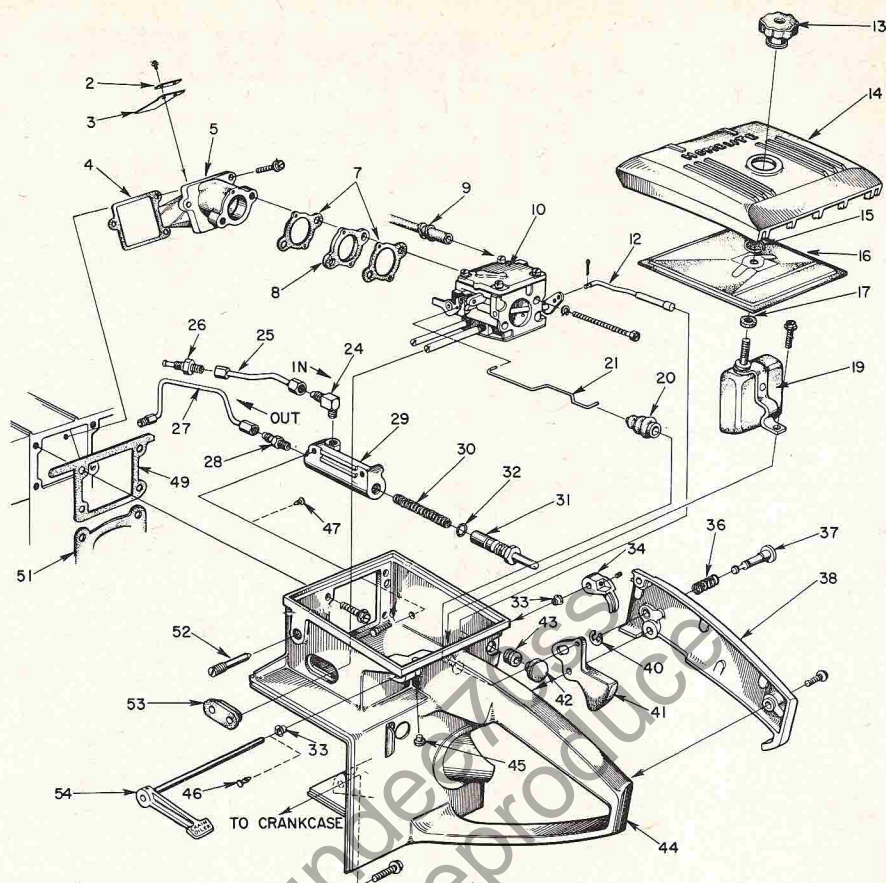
Exploded view of air box and handle assembly for early model XL-700. Model XL-800 is not equipped with manual oiler pump (items 24 through 31) and operating lever (34 and 54) although late model XL-800 has provisions for installing same. Model XL-850 and late models XL-700 and XL-800 have "Delrin" pyramid reed seat which does not use reed retaining plates (2) and screws.
